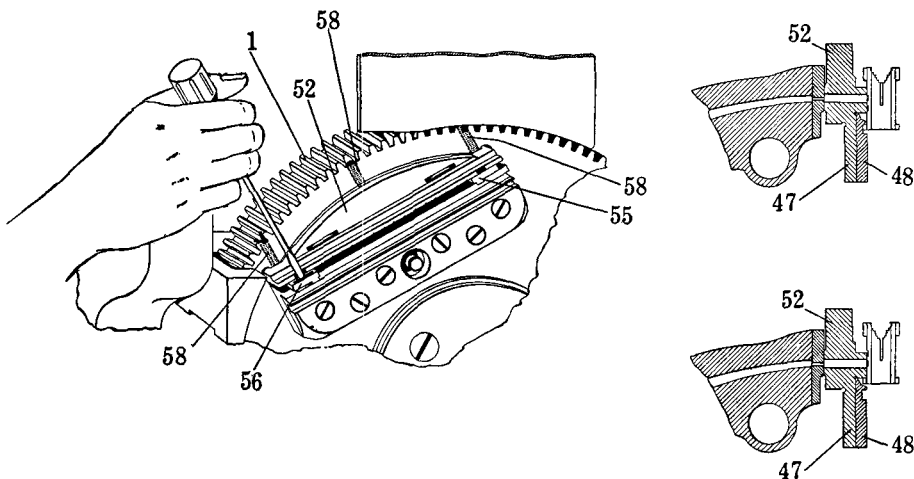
View showing the method of removing and replacing liners in the mold. In this figure, 1 is the mold disk, 56 is the liner, which has in its upper edge a small groove in which the end of the screwdriver may be inserted when removing the liner. The screws 58 have been loosened a little so as to relieve the mold cap 52.
